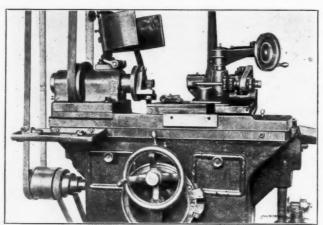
Grinding the Holes in the Universal Joint Pivots
